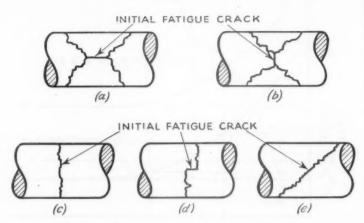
Various types of fatigue fracture for pure torsion.
